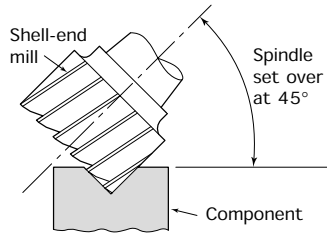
Milling a V-slot using a shell end mill on a vertical milling machine
